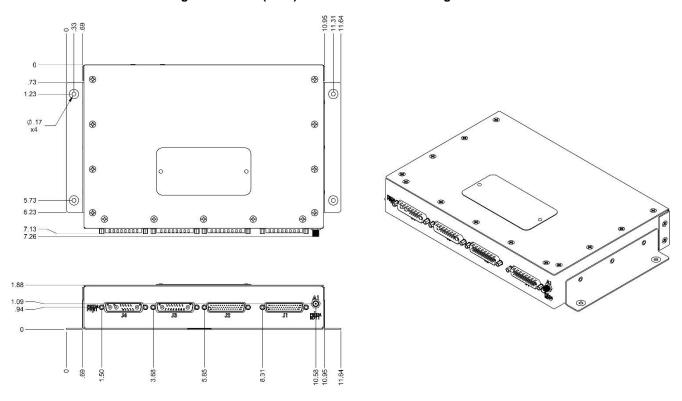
PRIZM -51 Dimensions and Mounting Dimensions
